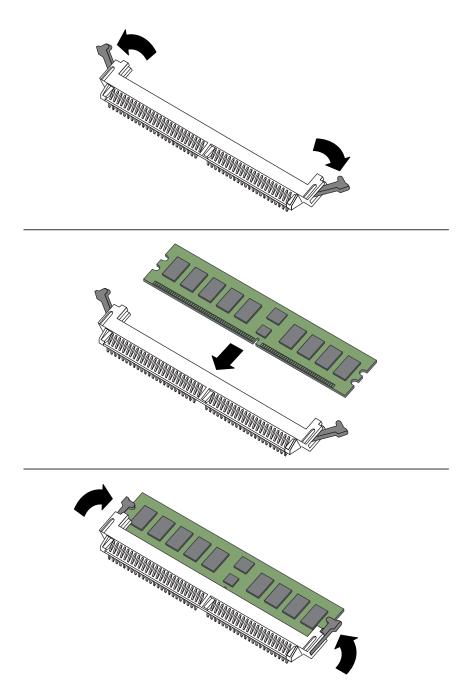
Installing a DIMM Into a Board Memory Connector
